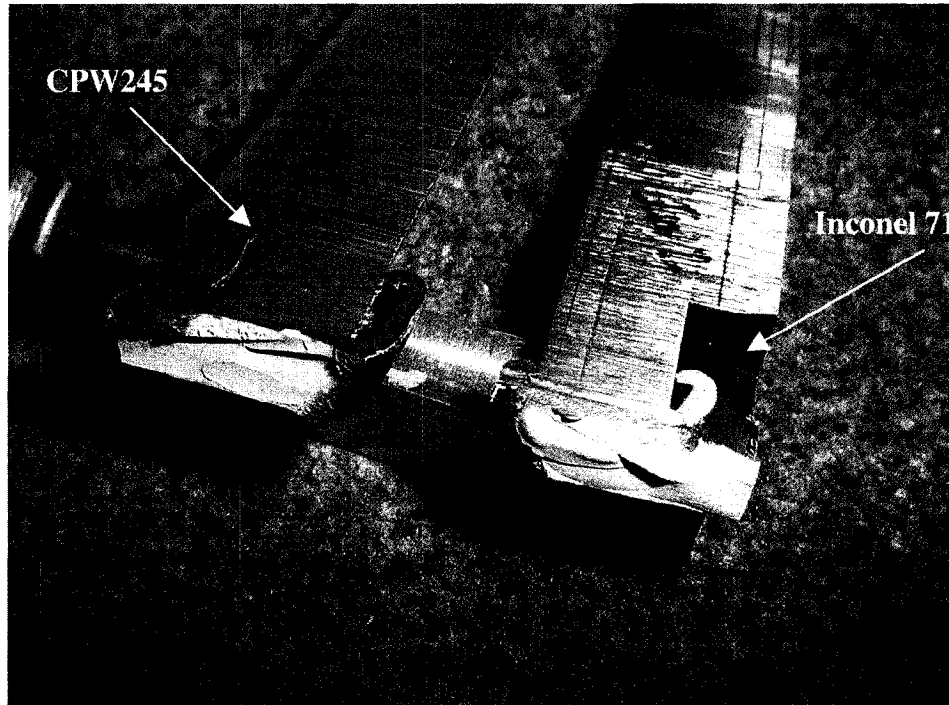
IW2 - Interface of the weld after tensile test
